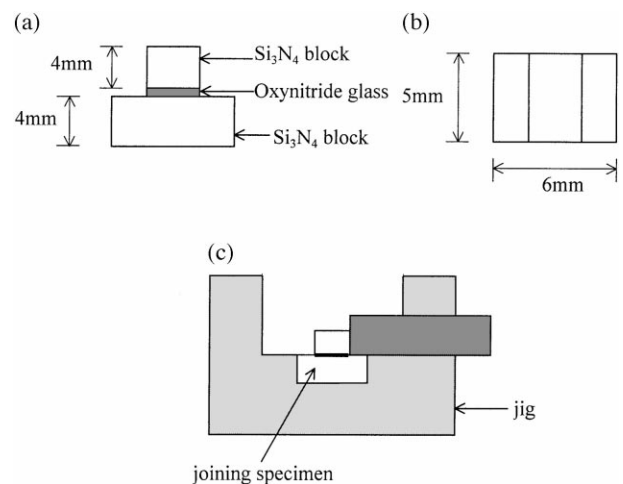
Specimen configuration for shear tests and shear test arrangement: (a) side view of specimen; (b) top view of specimen; (c) specimen mounted in test jig.
